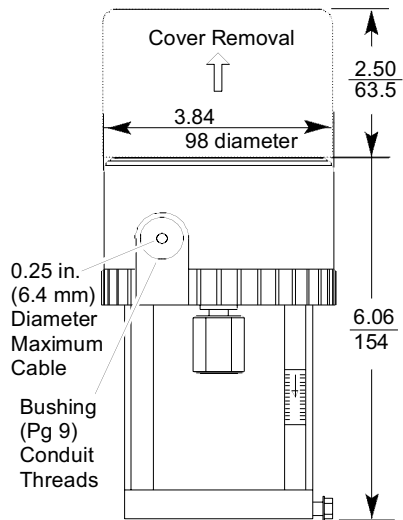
VAL-NR090 Series Dimensions (in./mm)
